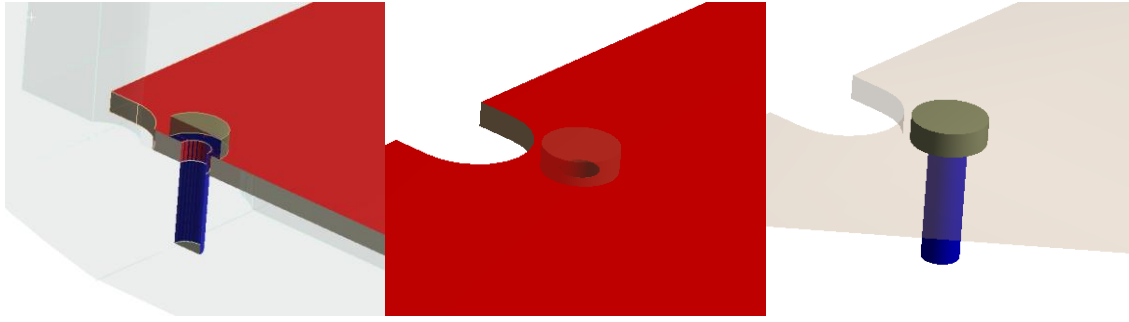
Frictional contact between screw and MMI board. The screw shown is fastened into the front panel
